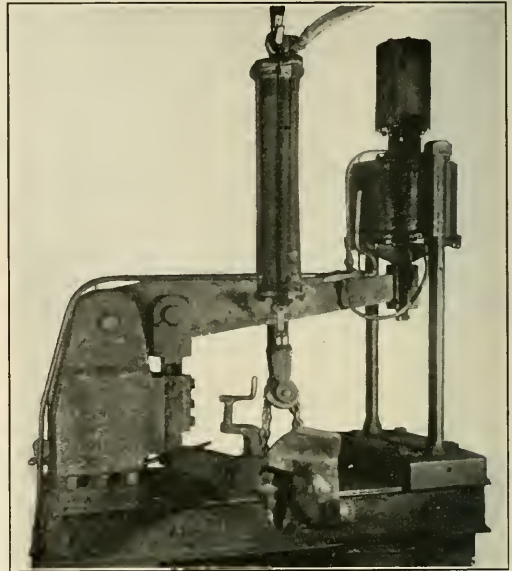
Pneumatic Machine for Shearing Coupler Rivets
